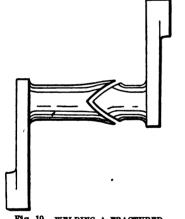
WELDING A FRACTURED ROCKER SHAFT.
